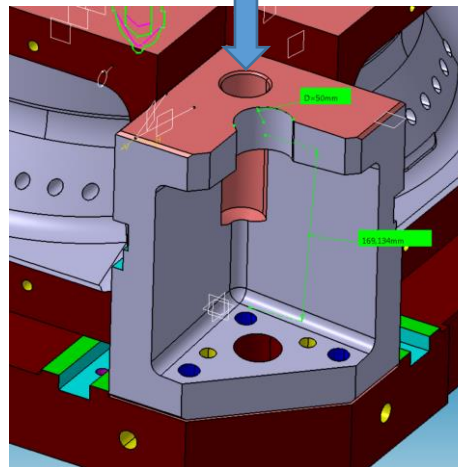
b. Dimensioning of the slot opened on the mold and 3D geometry.
